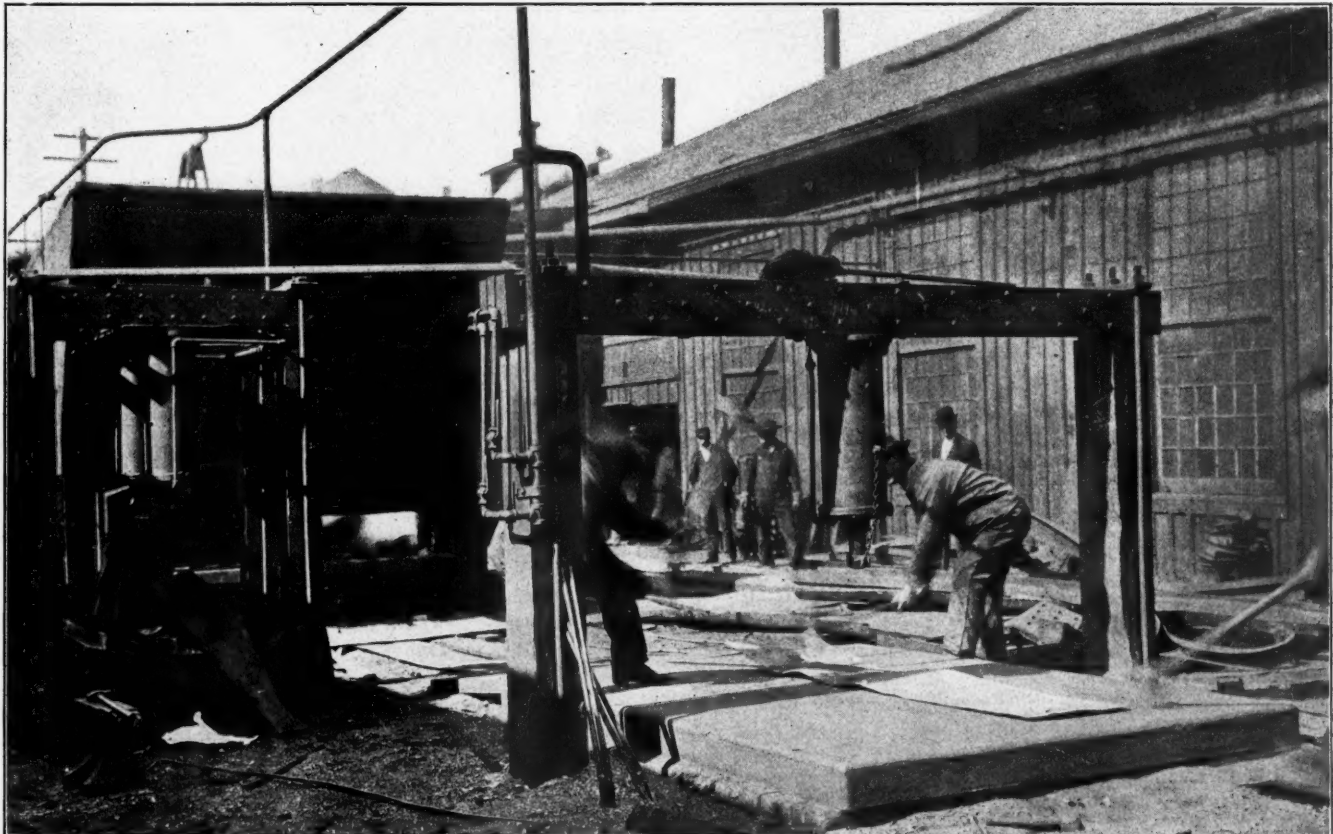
Furnace and Face Plate for Heating and Straightening Large Steel Car Parts.
